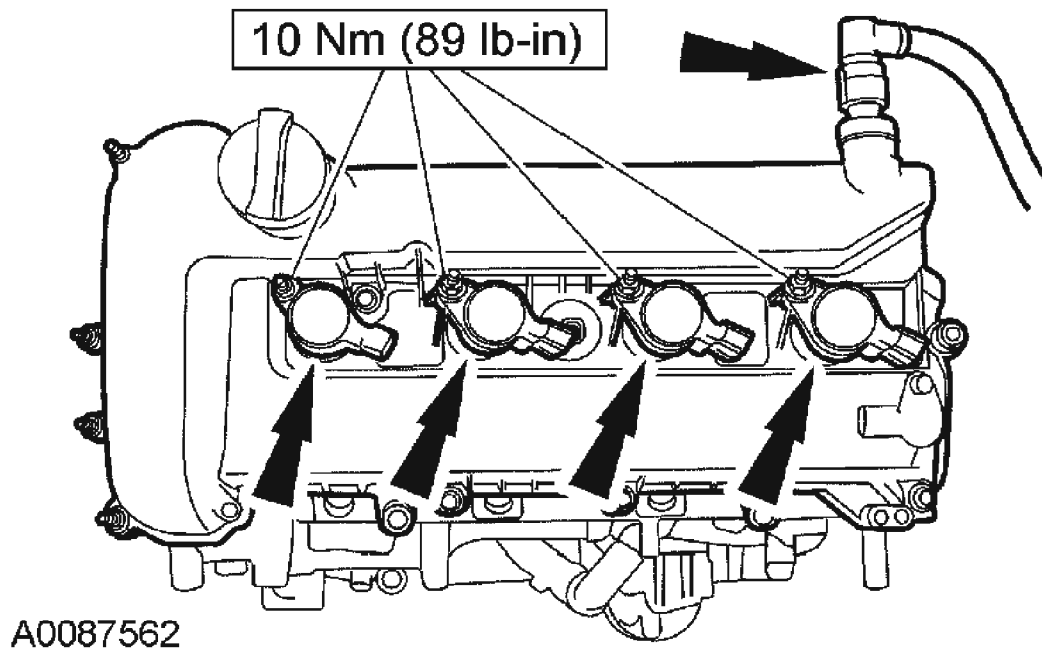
Installing Coil-On-Plugs And Crankcase Vent Tube
